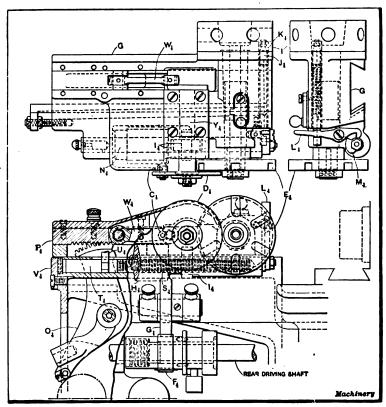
Plan and Rear Elevation of No. 00 Machine showing Operation of Turret Slide, etc.
